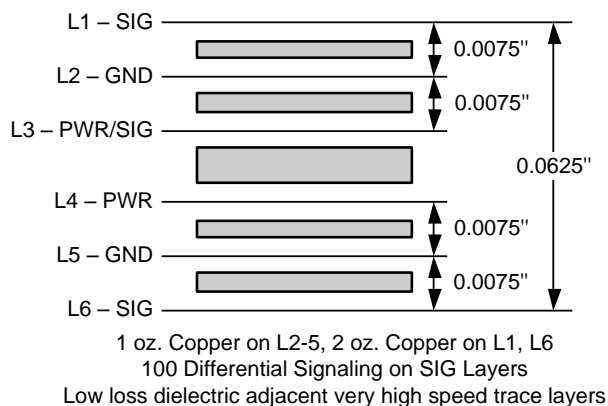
Recommended PCB Layer Stack-Up for a Six-Layer Board
